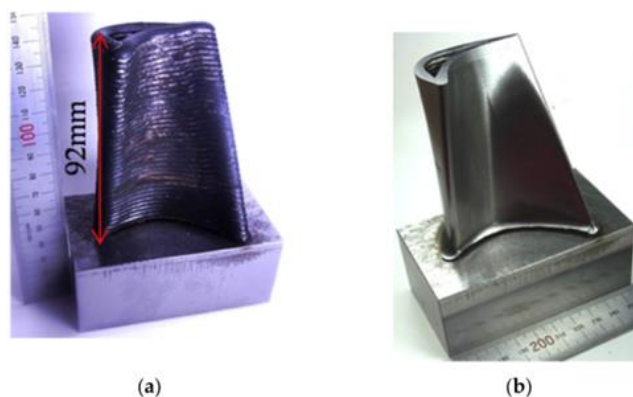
Stainless steel (SS400) turbine blade manufactured by WAAM (a) before finishing, and (b) after finishing [26]
